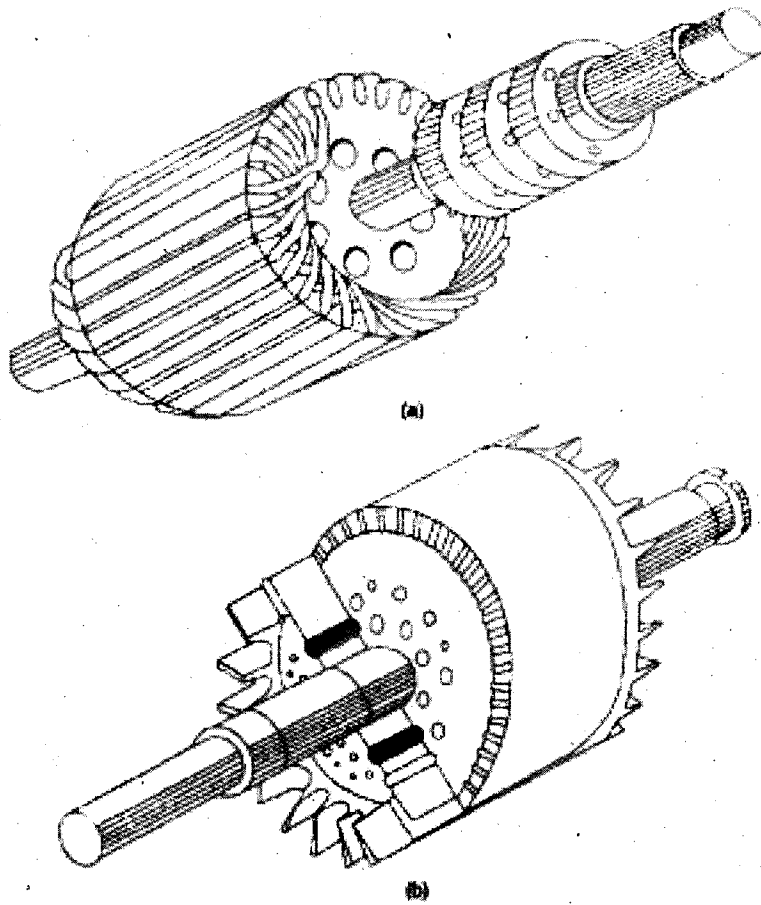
Rotor for (a) Wound Rotor (b) Squirrel Cage Induction Motor
